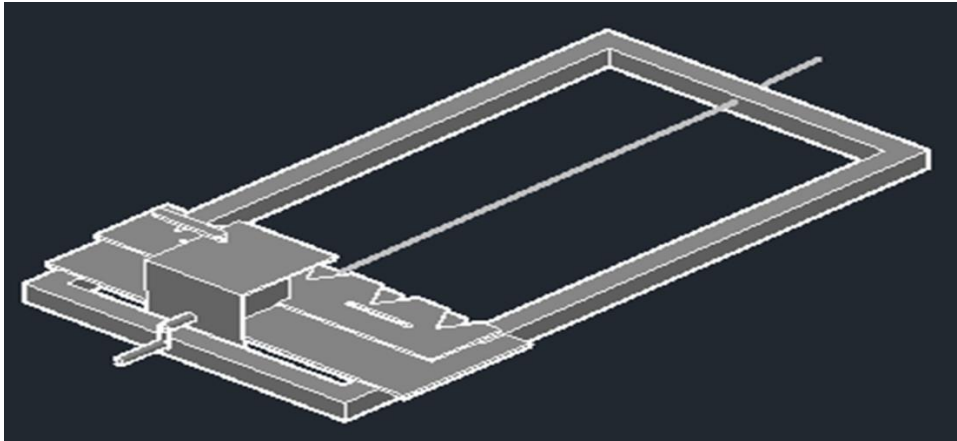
2 (b) Fodder cutting mechanism (isometric view)
